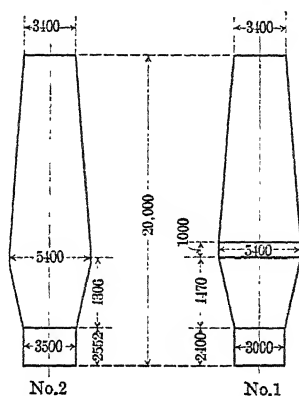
PEN-HSI-HU BLAST FURNACES, SECTIONS IN MM.
